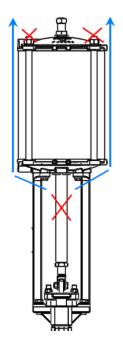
Knife Gate Valve with Pneumatic Cylinder Actuator, Vertical Lifting
